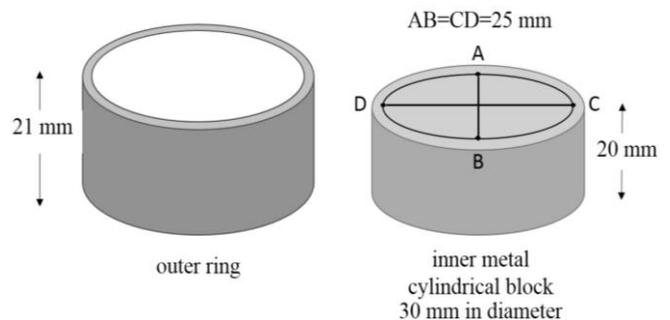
Diagram showing stainless steel mold for disc-shaped specimen and measurement points for dimensional change.
